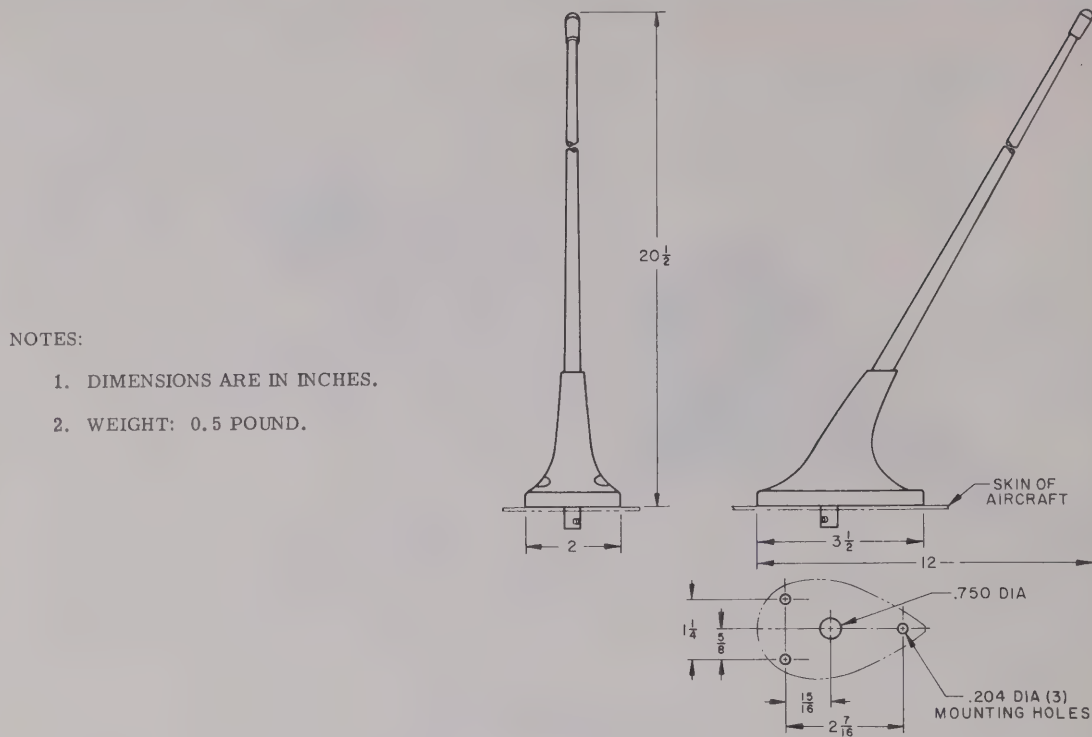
37670-0000 Antenna, Installation Dimensions
